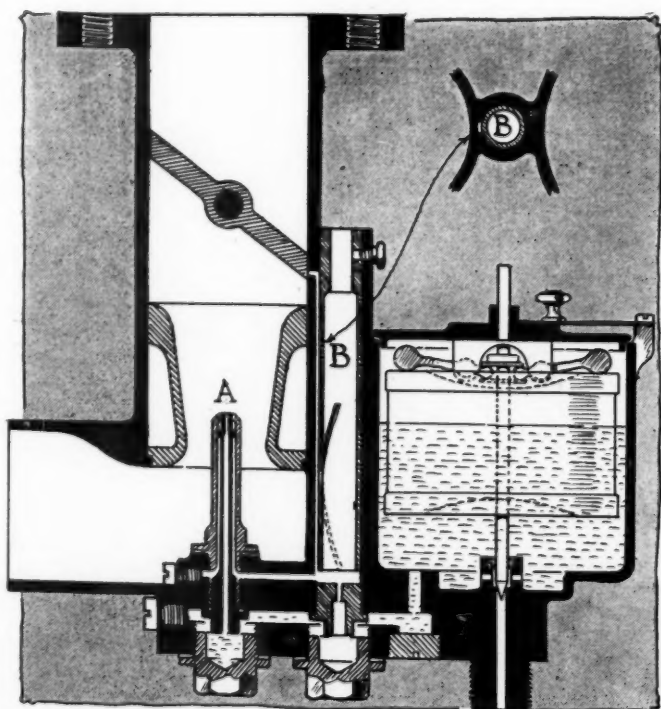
Cross-section of Zenith carburetor, showing concentric jet
